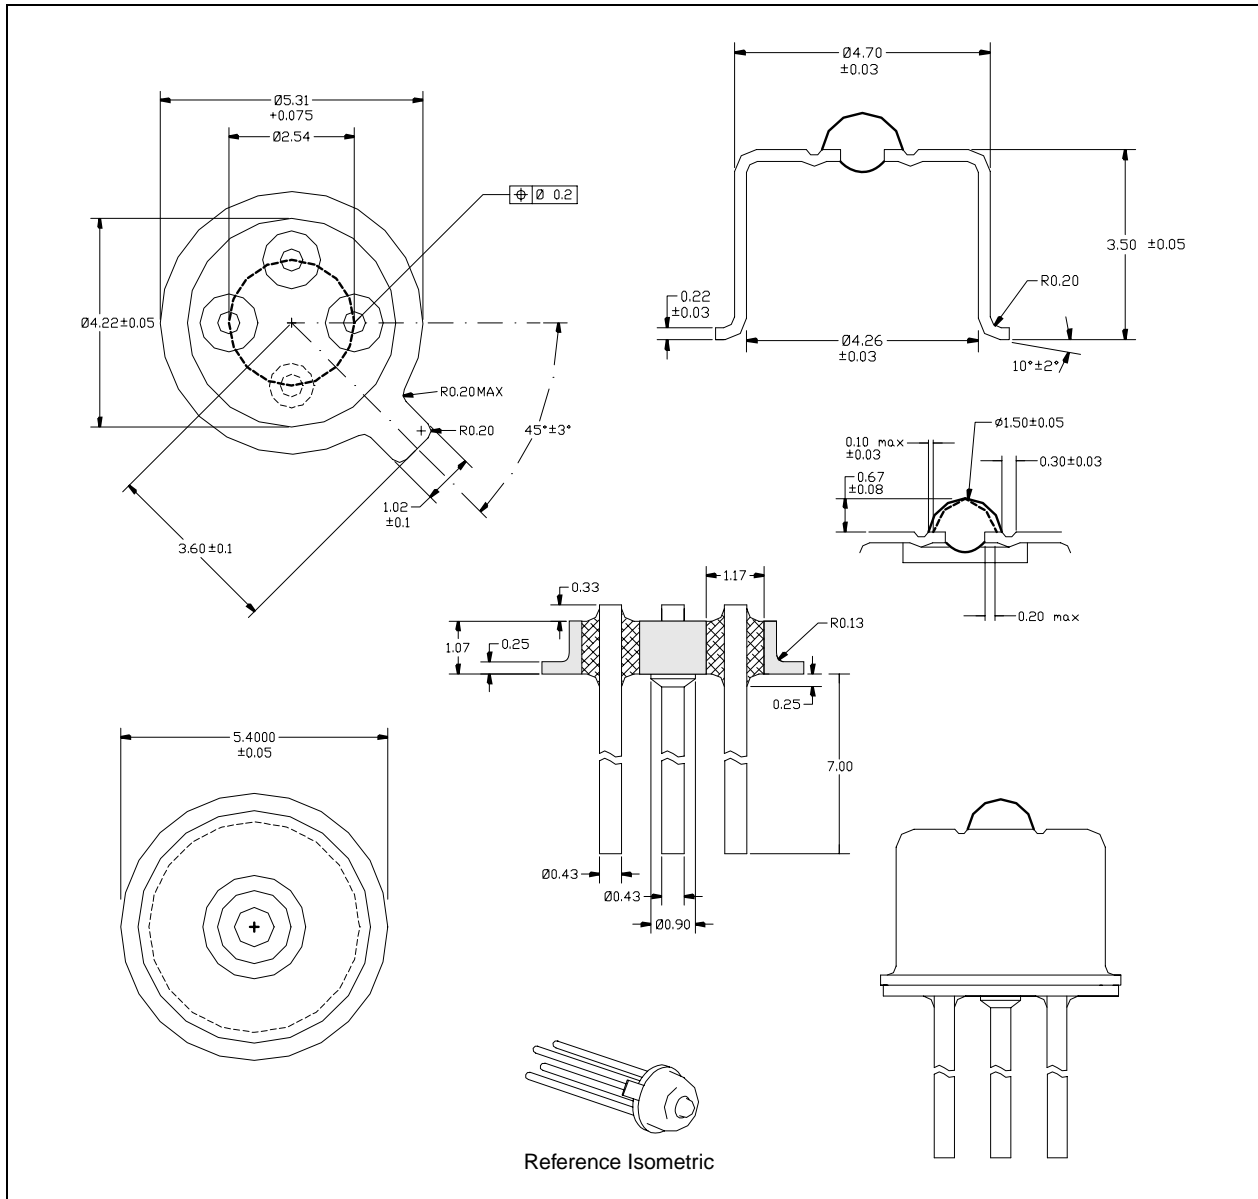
Package Drawing for TO-46 Ball Lens, 7mm Lead Length (WC)
